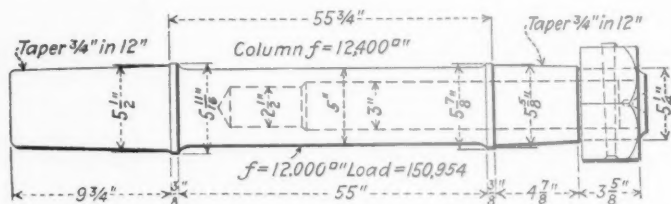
Design of Piston Rod of Annealed Carbon-Vanadium Steel for 2-10-2 Type Locomotive
